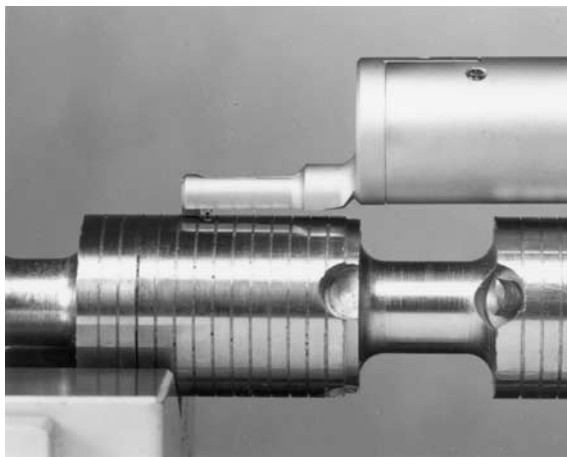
Surface texture of component being inspected using a skid. (Courtesy of Taylor Hobson.)
